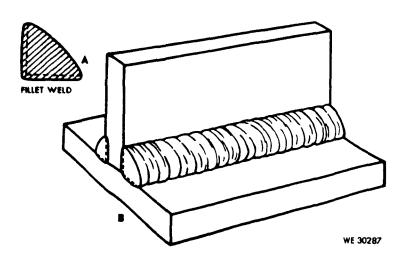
Tee joint-single pass, fillet weld.
